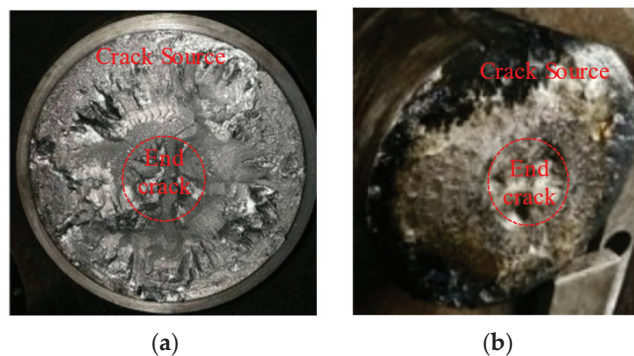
Appearance of the fracture of a load drum shaft: (a) cross-section of the left load drum shaft; (b) cross-section of the right load drum shaft.
